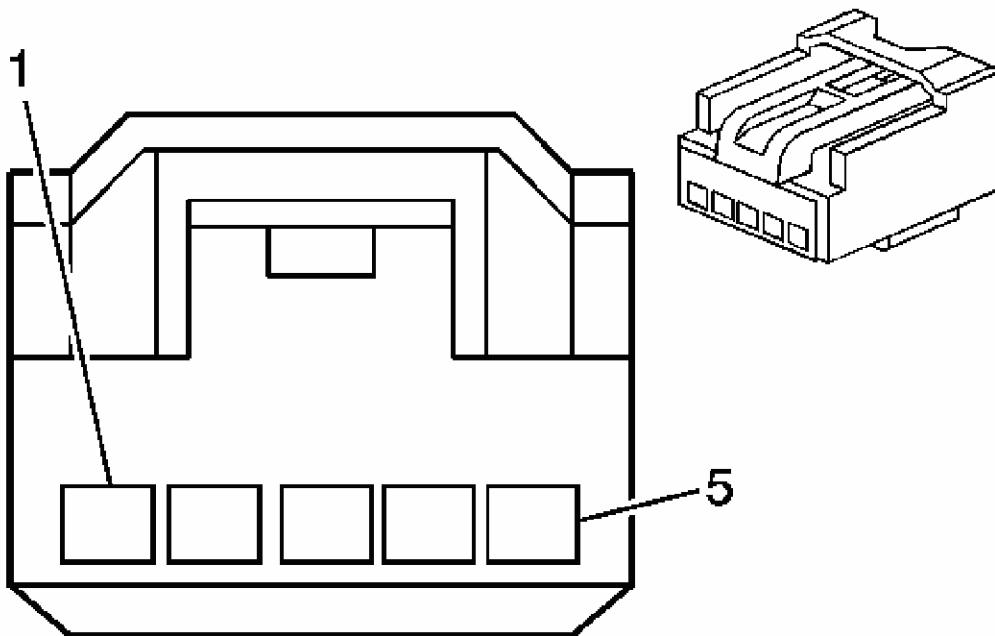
Air Temperature Actuator Connector End View - Front Passenger
